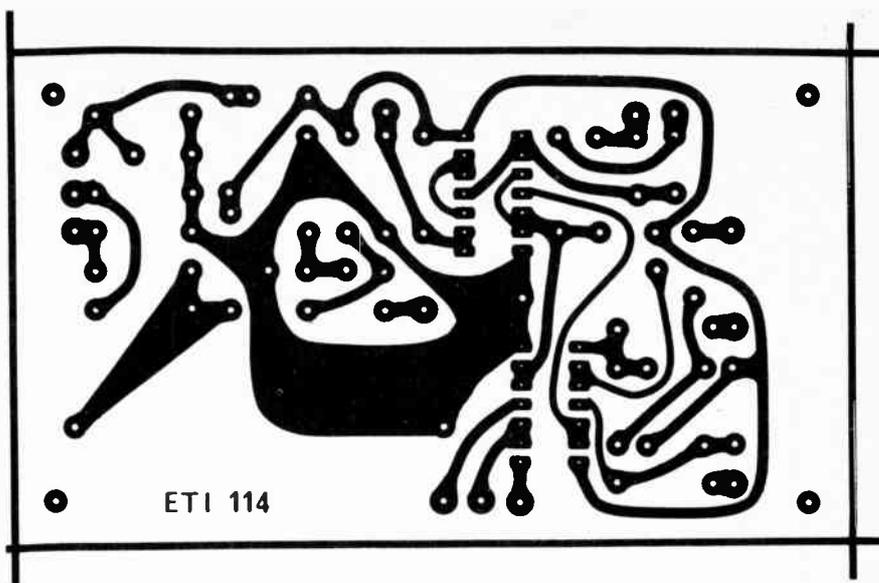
Printed circuit board pattern for the adaptor. (Shown fullsize).
